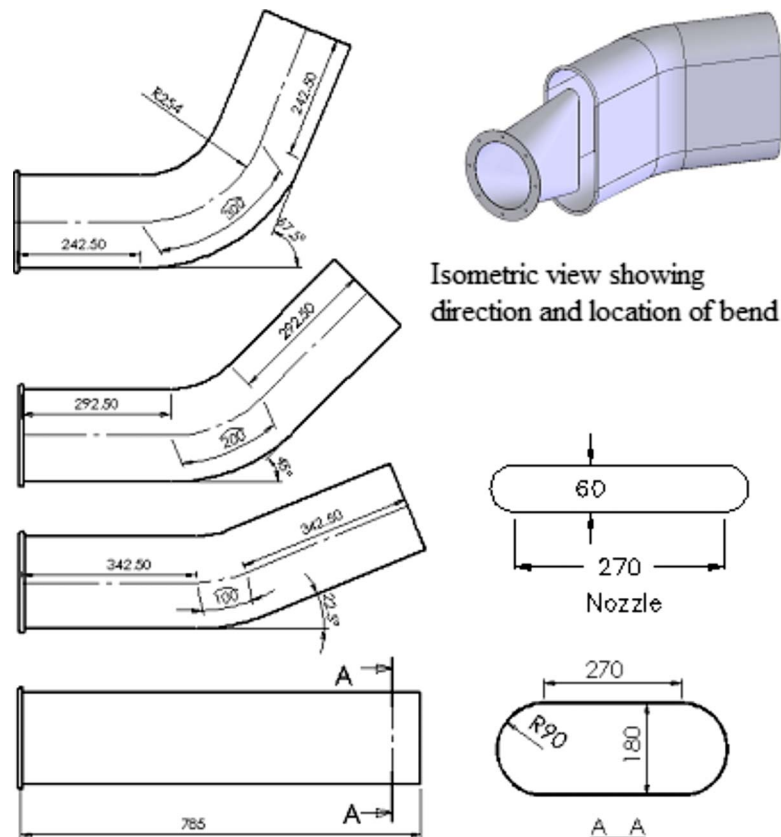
Geometry detail of the test ejectors (all dimensions are in millimeters)
